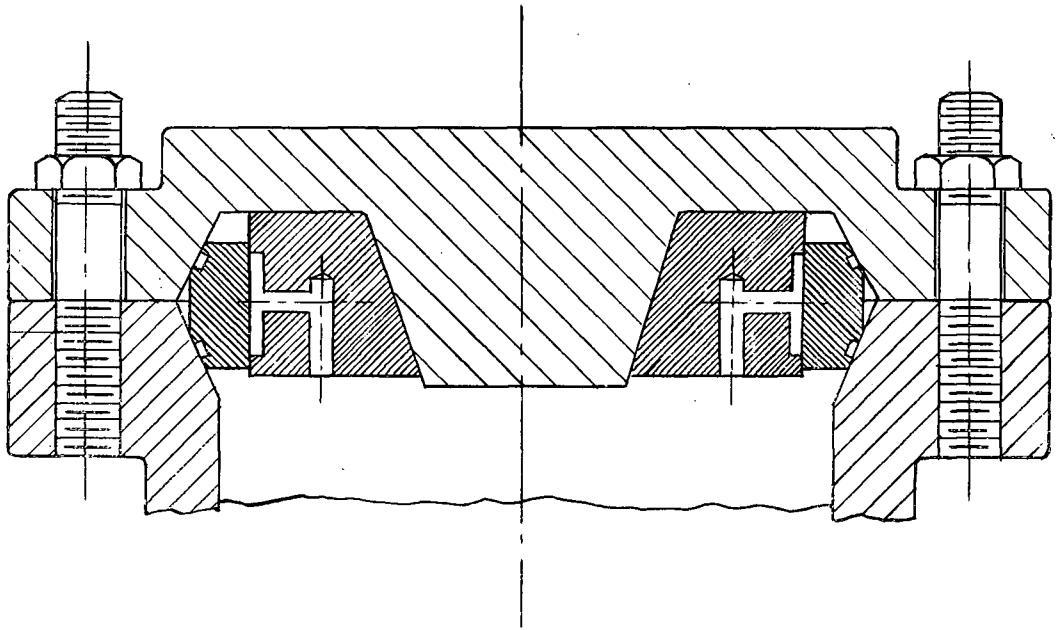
A Modified Double-Cone Ring Gasket Design
